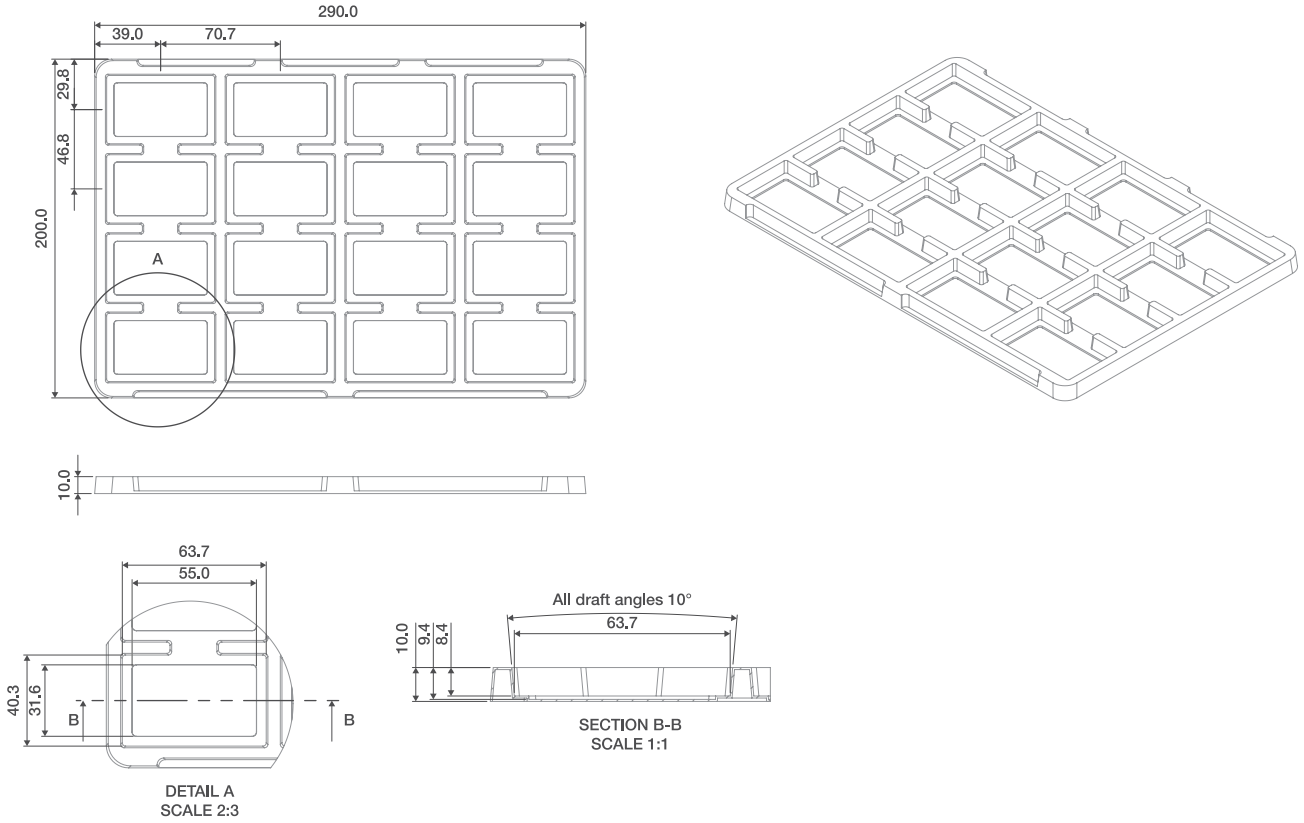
STANDARD PACKAGING BOX DIMENSIONS
